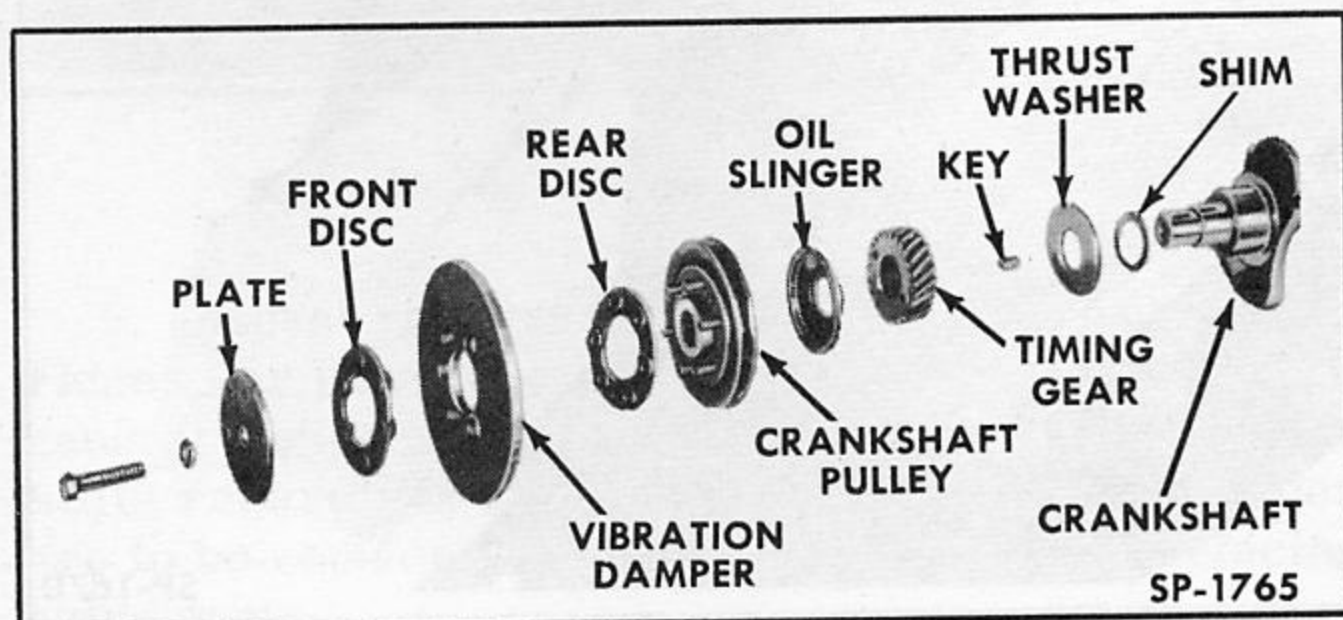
Vibration Damper—6 Cylinder—Exploded View
